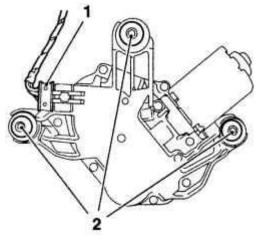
Mounting wiper motor: 1 - slot 2 - bolts fixing
